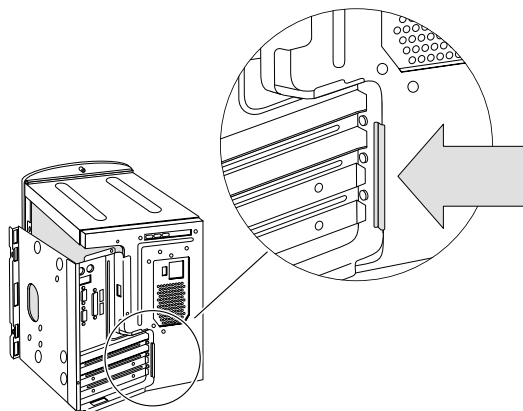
Motherboard Access Panel Interlocking Hinge
